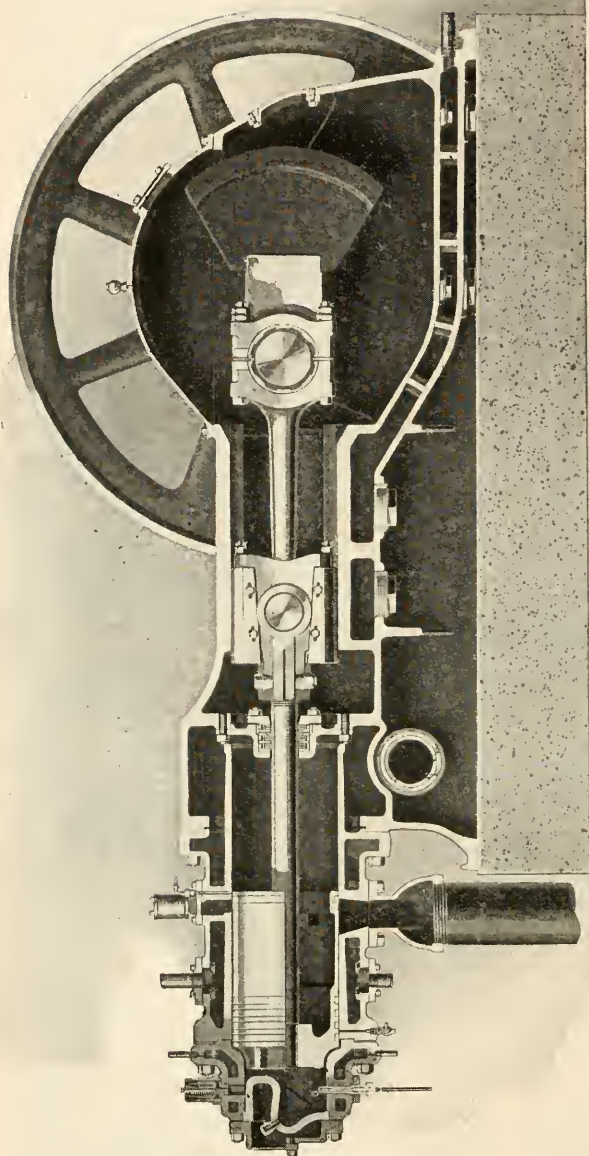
"Bessemer." Courtesy Bessemer Gas Engine Co., Grove City, Pa.
